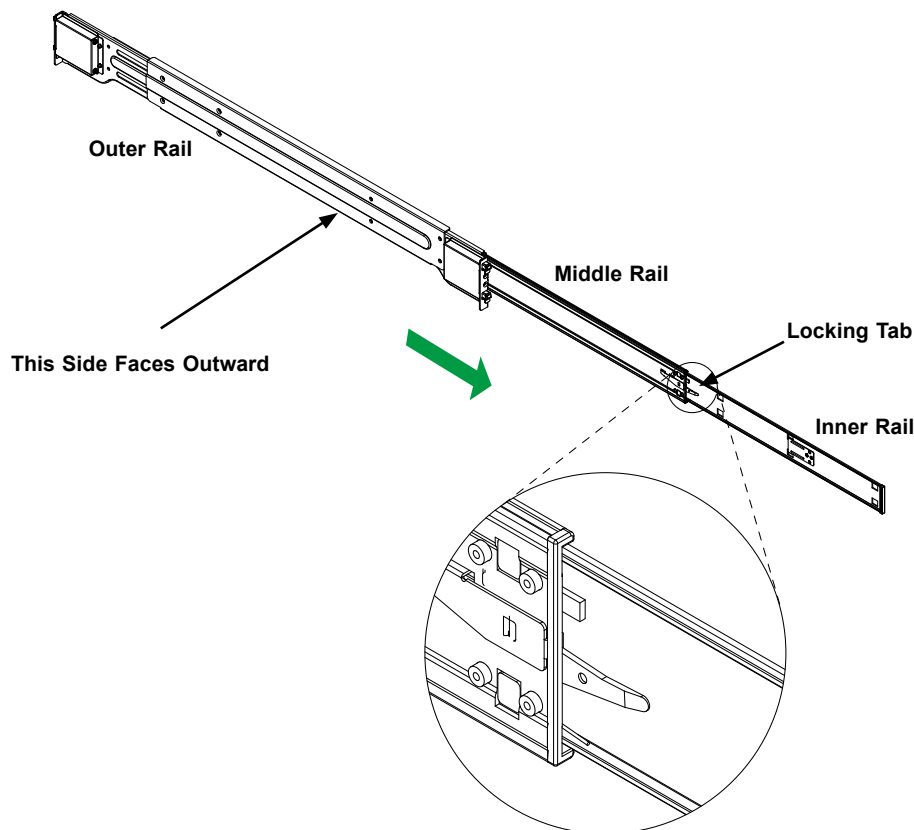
Identifying the Outer Rail, Middle Rail, and Inner Rail (Left Rail Assembly Shown)
